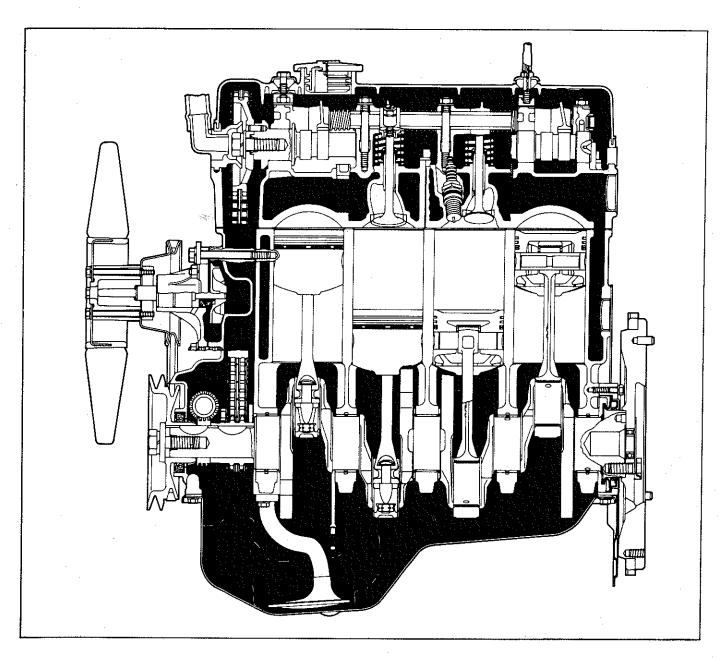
Saturn engine (with chain drive camshaft) longitudinal view
